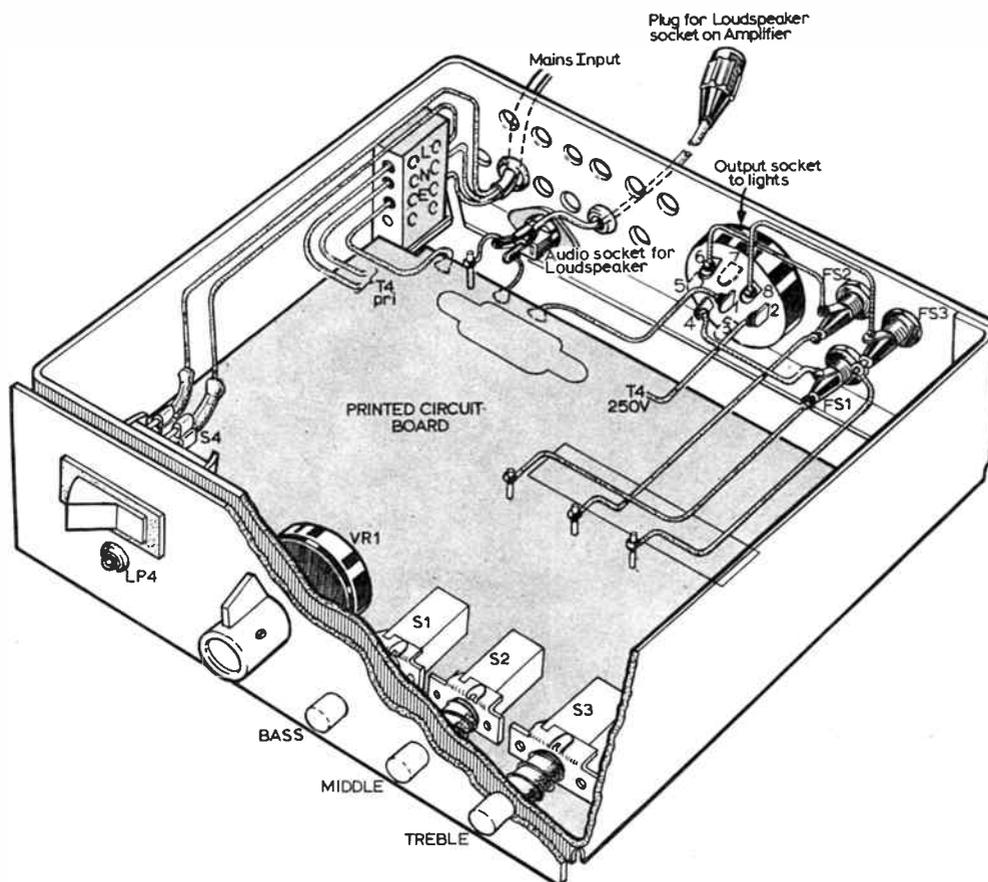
Wiring of chassis mounted components to the printed circuit board. Tag 1 on the lights output socket goes to chassis (and mains earth). The live lead (L) from the mains terminal block goes to the 250V tag on T4 transformer.
